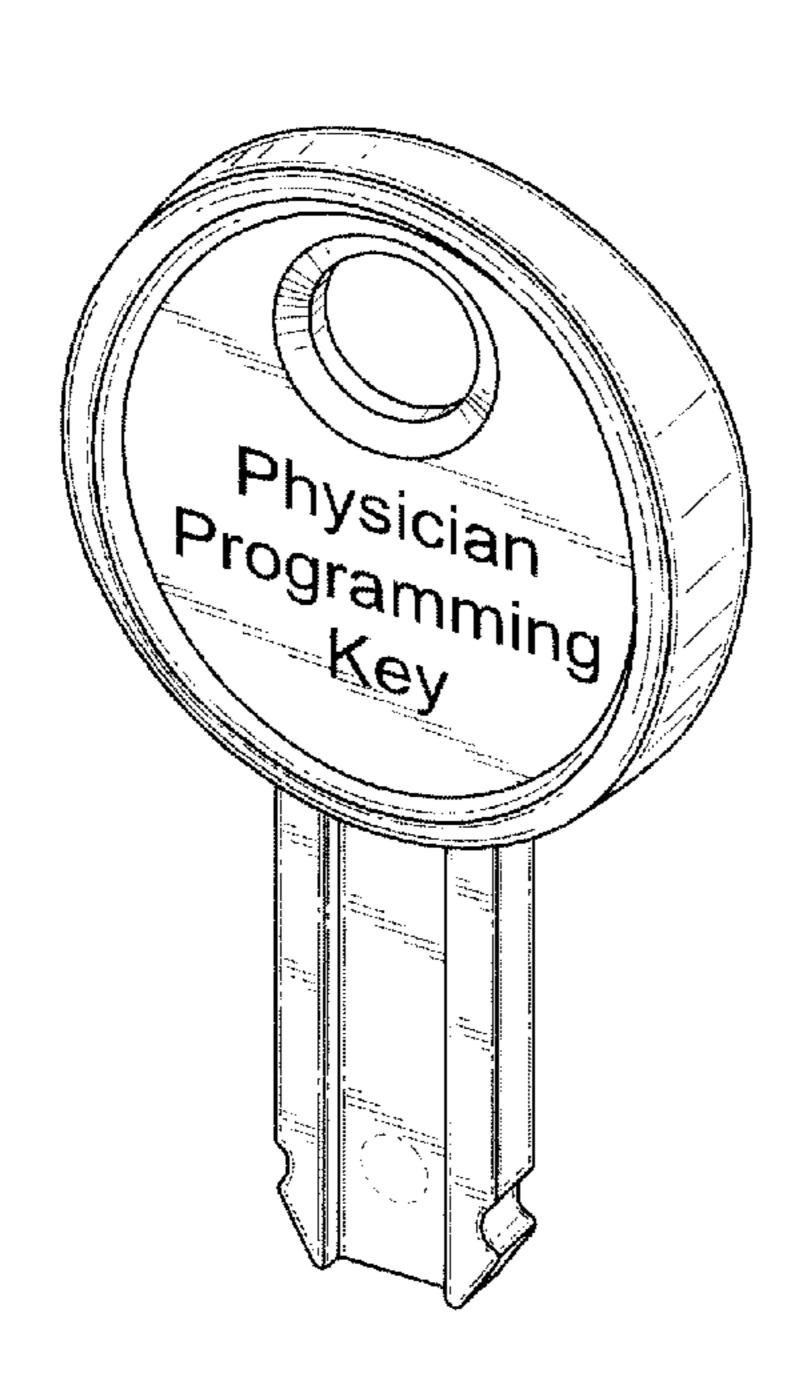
is a perspective view of a second embodiment of the new design; and,
